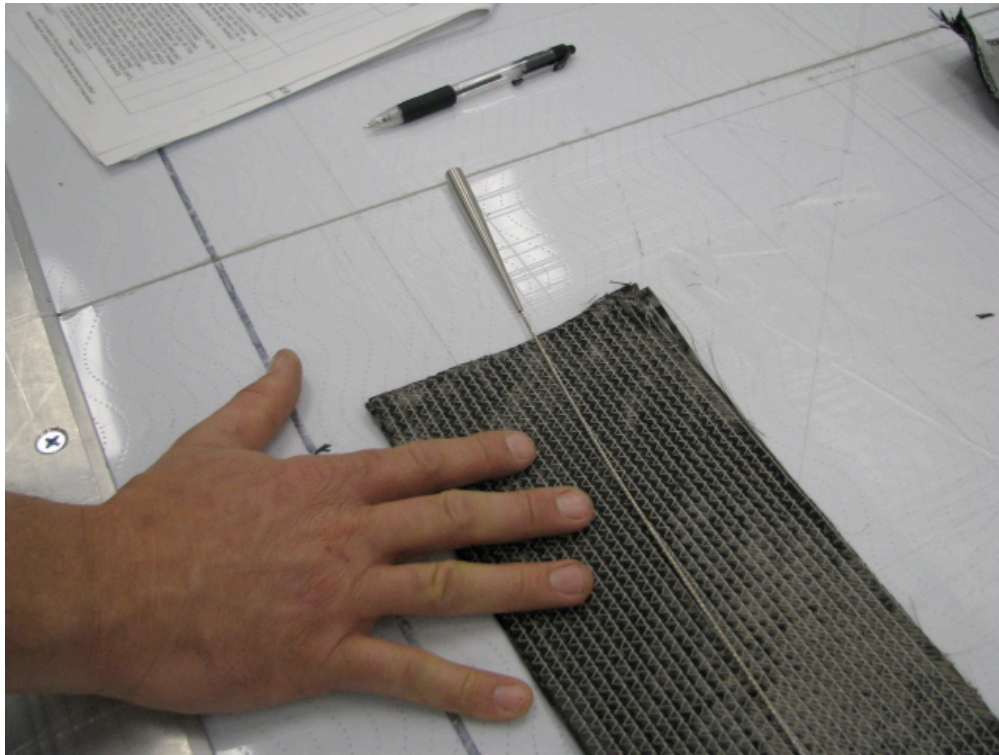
Leader Wire with Adapter Positioned Over Stringer Flat Pattern
